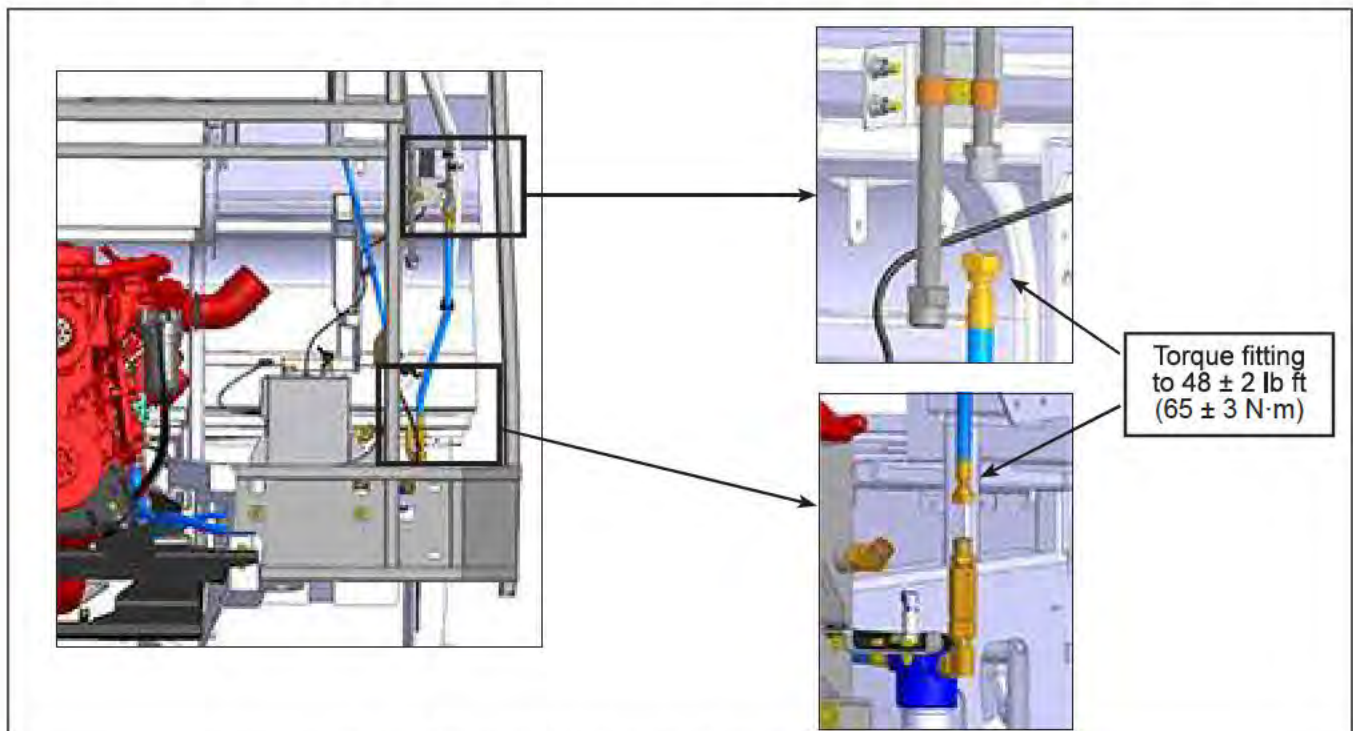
N95740-37 Hydraulic Hose Fitting Torque Value
